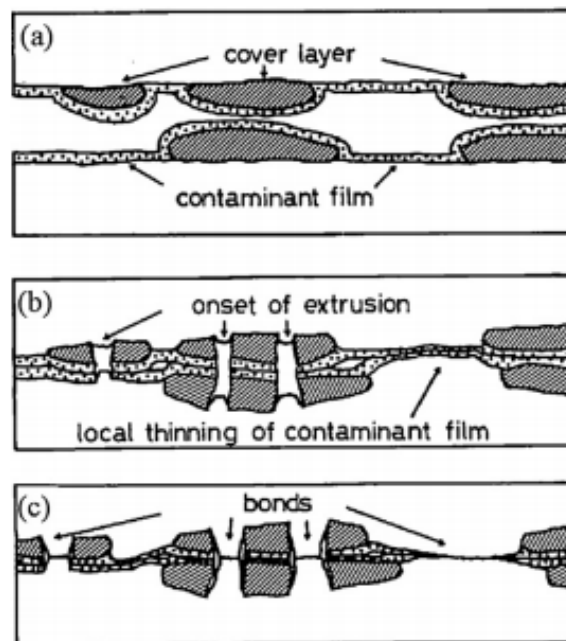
Model for bonding mechanism in cold welding. (a) Scratch brushed surface,(b) extrusion of virgin material and (c) bonding [7]
